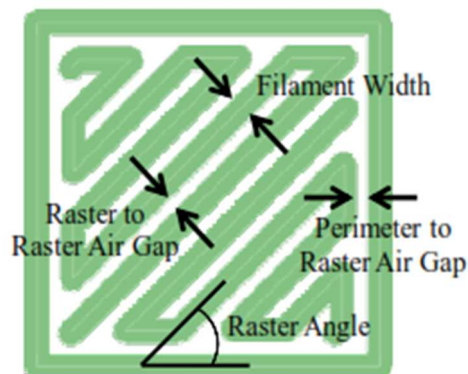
Close up view of a layer and tool path. Ref:[5]
